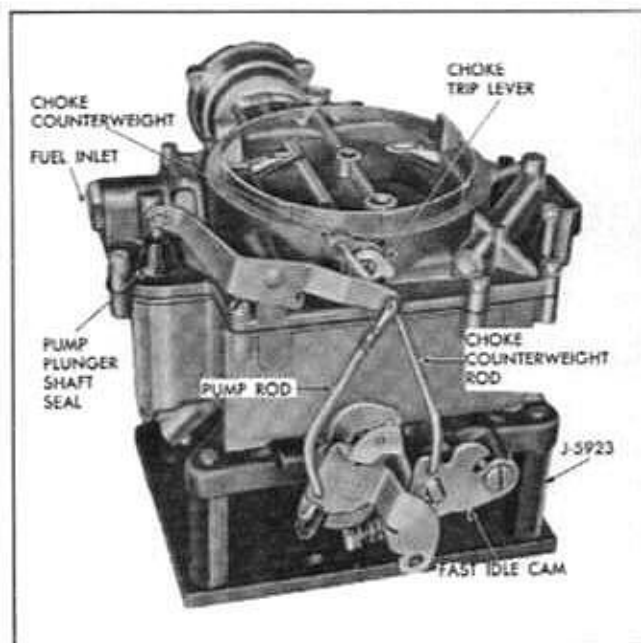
B-80 Rochester 4GC 4 Jet Carburetor
